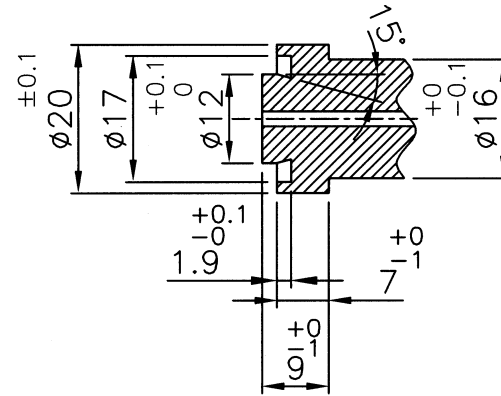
INLET WITH PARALLEL THREAD $M25 \times 2$
